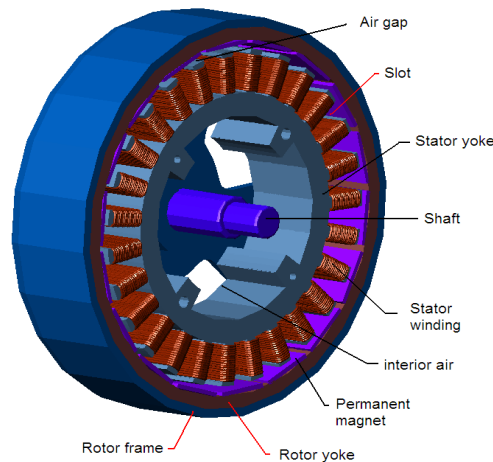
Prototype of studied radial flux, exterior rotor, surface-mounted PM machine with concentrated windings in a flywheel.
